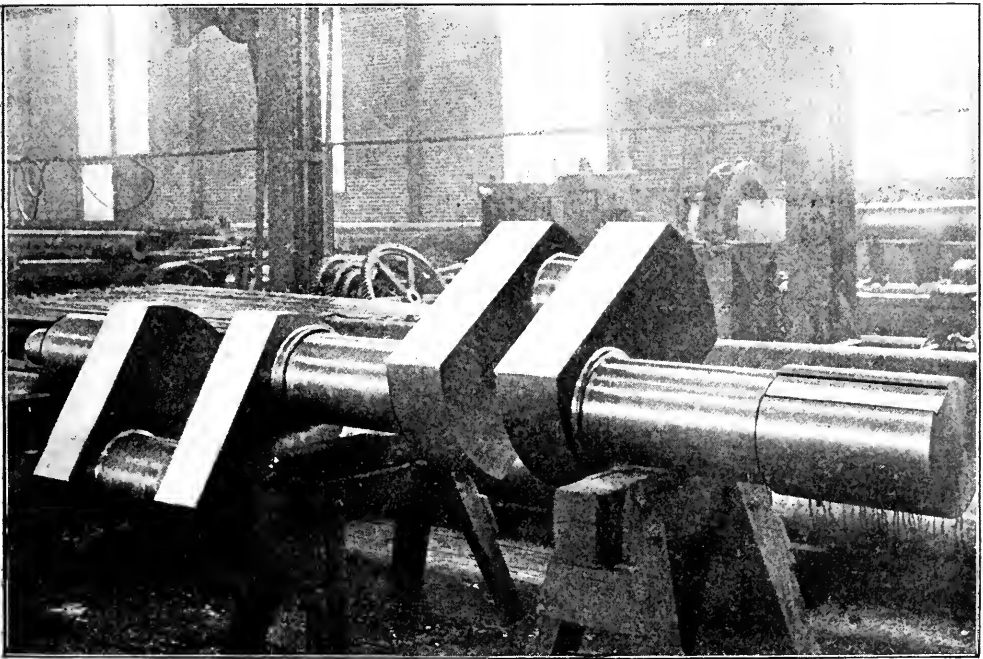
Double-throw Crank Shaft for the De La Vergne Refrigerating Machine Company of New York, N. Y. Diameter of shaft and pins, 12 in.; total length, 13 ft. $1\frac{1}{2}$ in.; weight, 9,836 pounds.
